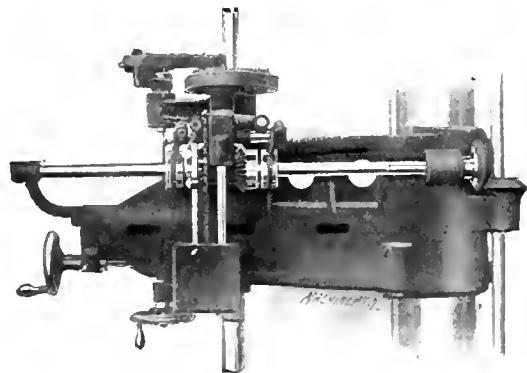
Rear of Head of Radial Drill showing Feed and Reversing Mechanism.
